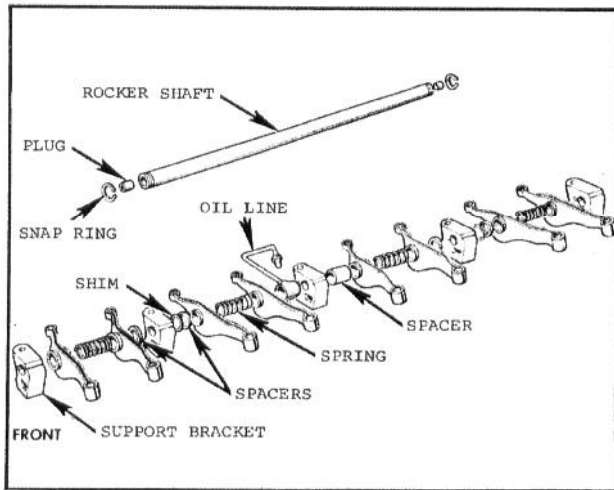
Rocker Arm Shaft Assembly Disassembled
